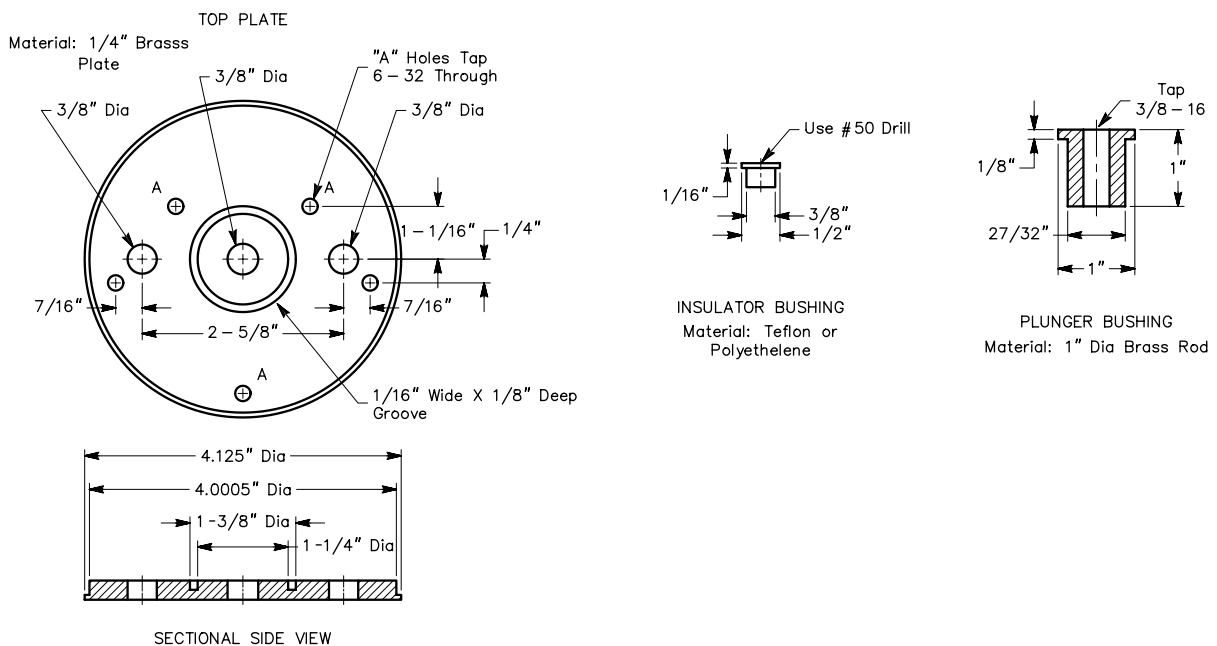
Dimensions for the three parts that require machining. A small metal-working lathe should be used for making these parts.
